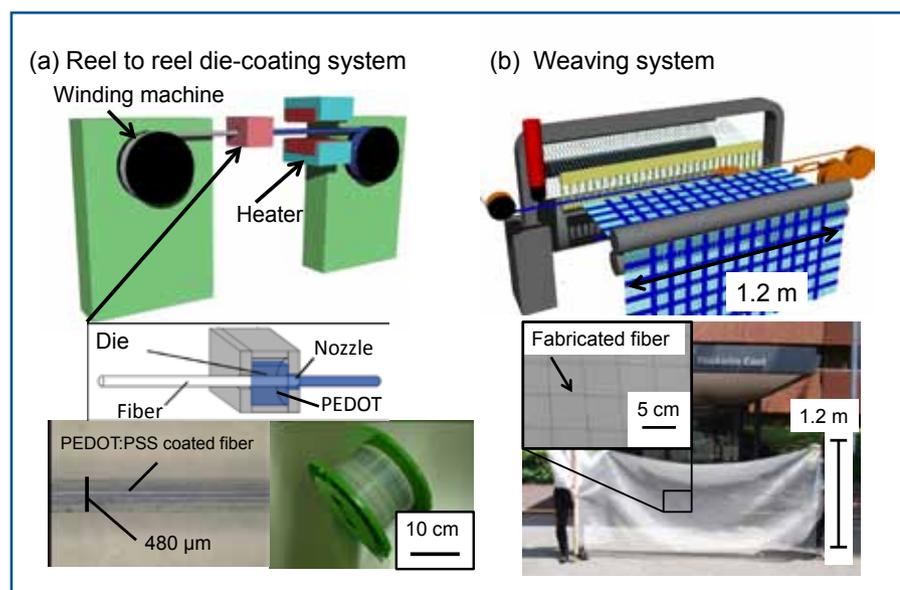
Reel-to-reel die-coating system and weaving system for the fabrication of large area touch sensors.
